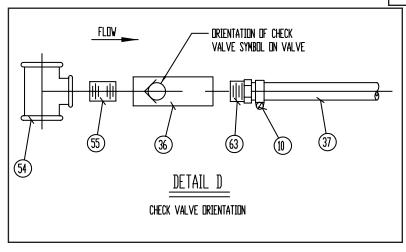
HYDRAULIC, FRONT LIVE (SHEET 6 OF 6)
